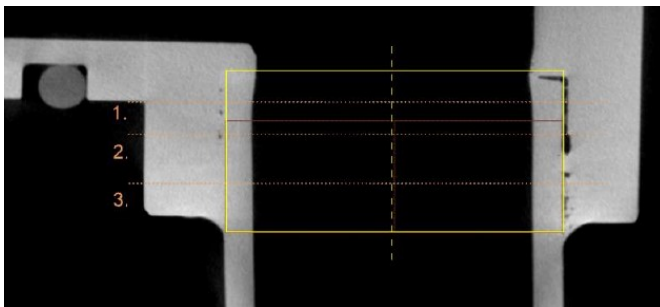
NOK soldering of A/C pipe (porosity and filling)
